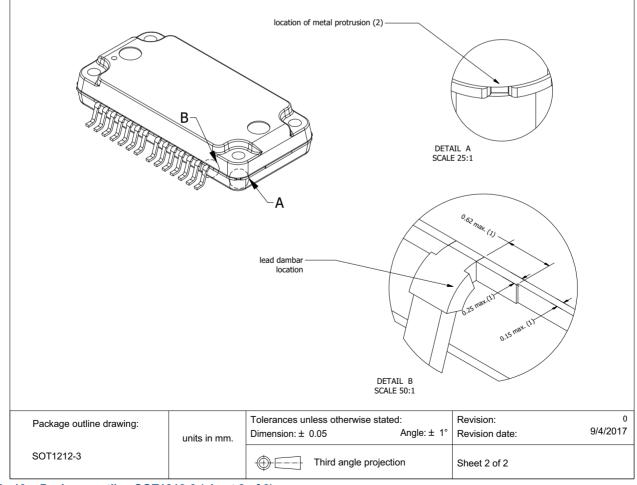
Package outline SOT1212-3 (sheet 2 of 2)
